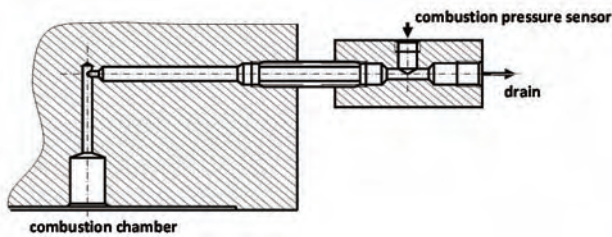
The mounting position of the pressure sensor in the indicator channel
